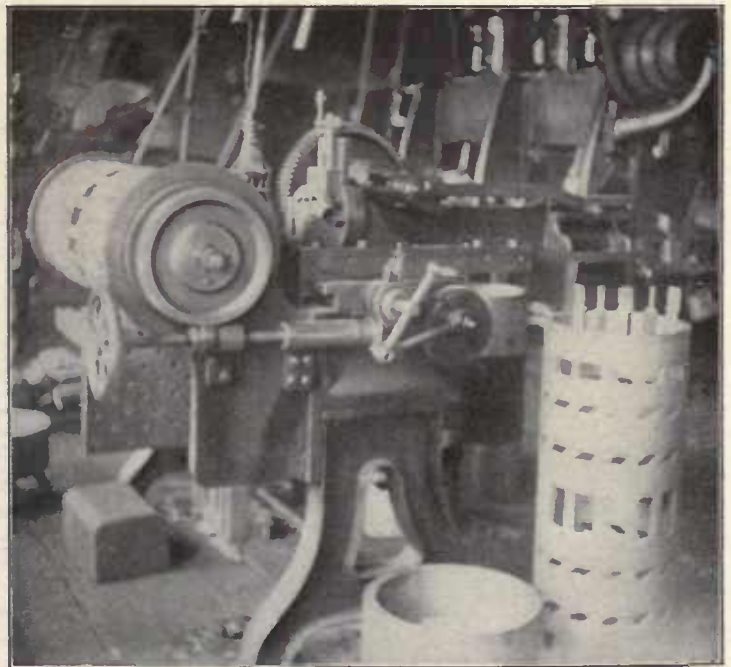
Shaper Using Special Tool on Valve Bushing.
